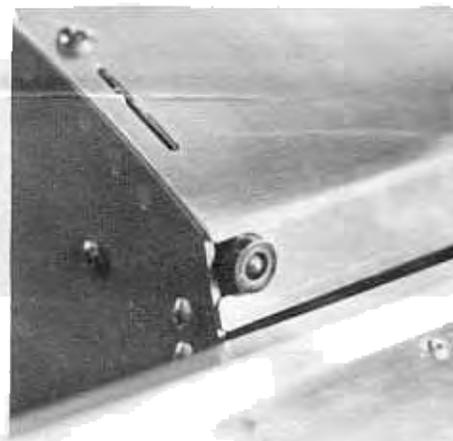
is a shot of the RH. Track Assembly taken in the rear cockpit looking outboard. The Canopy is full aft. At this position you can see the countersunk mounting screws visible through the holes in the inner track member. The nuts (AN315-3R) are not visible in the photo but are tack welded to the Outer Track Fuselage Mounting Bracket. The 2 darker lines running parallel with the track are actually ballbearing strips. There are two more ballbearing strips that in the track member to which the 4130 Flange and Pin member is riveted. All of the members of the Triple Track Assembly start out in life as Alum. extrusions, However, the raceways for the balls are machined with a Broach. This results in a degree of precision that is not matched by any other track. When the tracks are fully extended, there is absolutely no play in the vertical loading plane.
